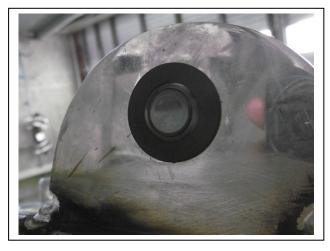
Steel mounts fitted to vehicle. Bumper removed for photo
